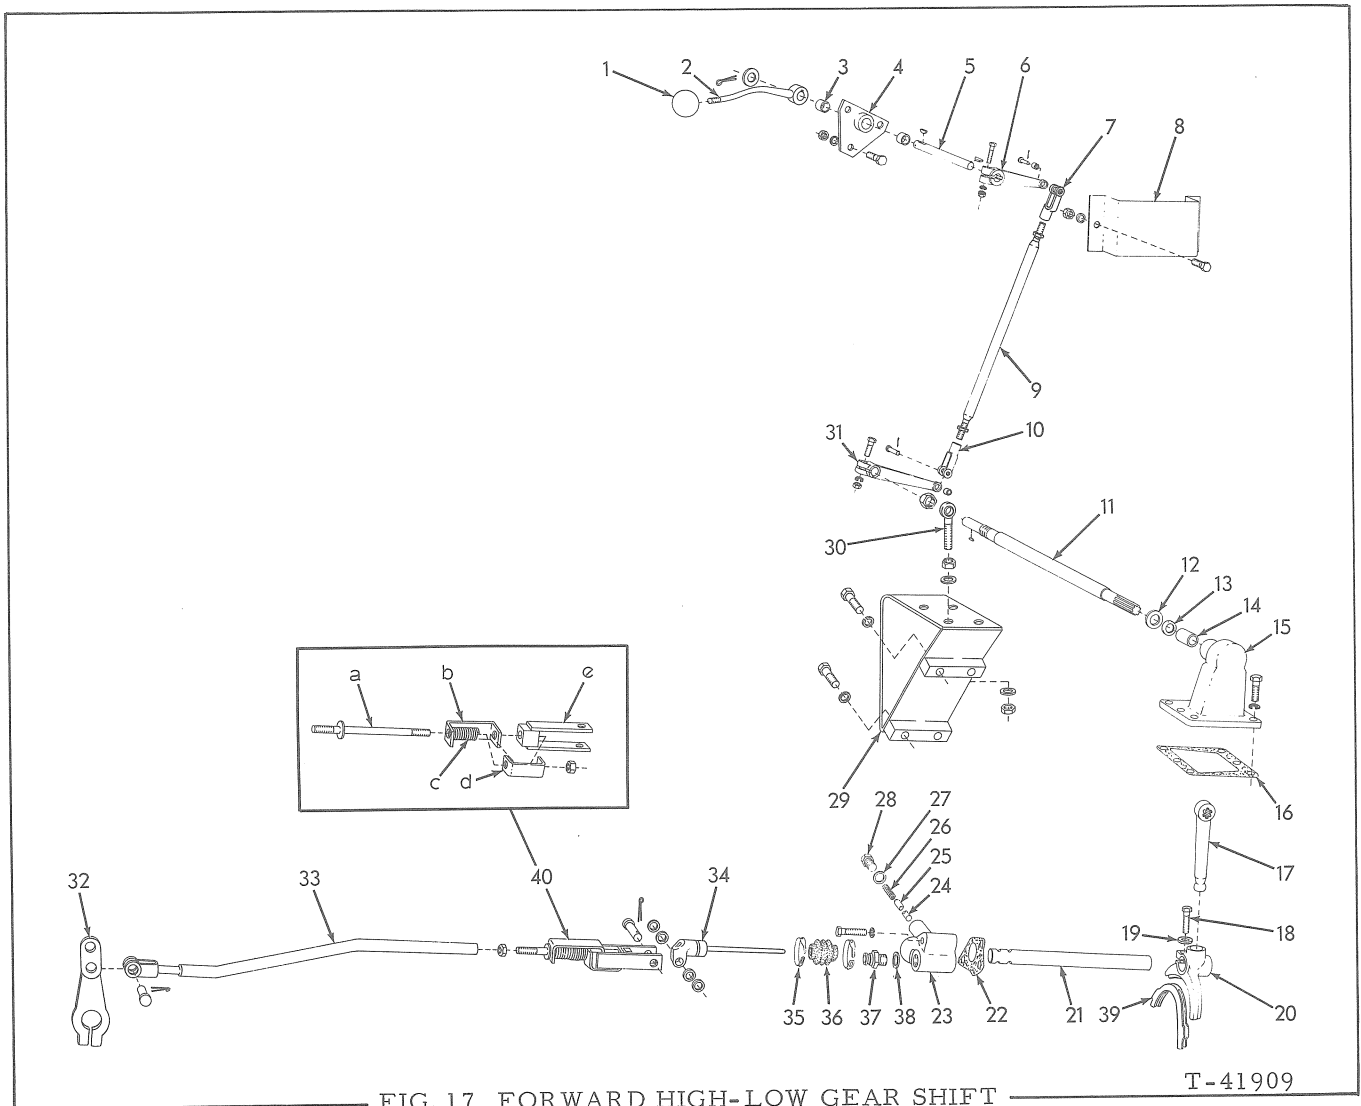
FORWARD HIGH-LOW GEAR SHIFT
